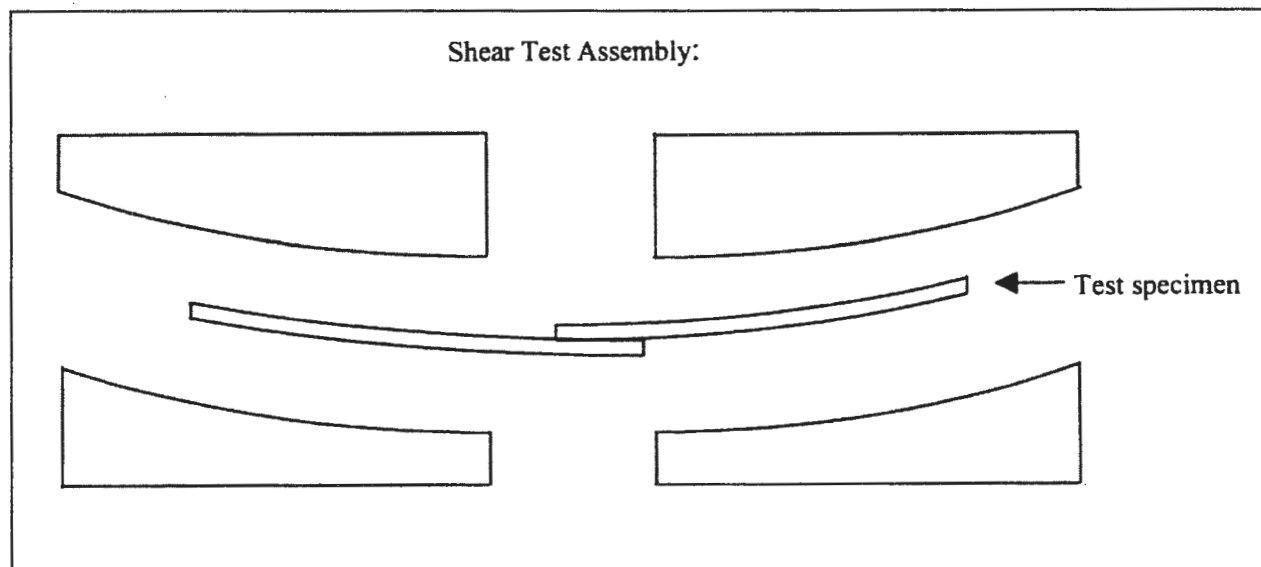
Shear test assembly for seam weld specimens.
